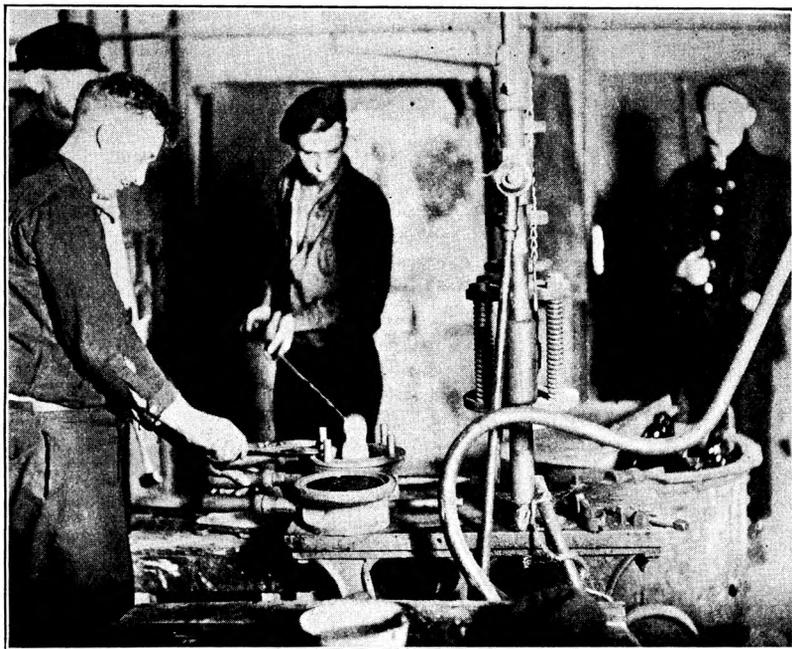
SIDE LEVER PRESS FOR MAKING PRESSED GLASSWARE
